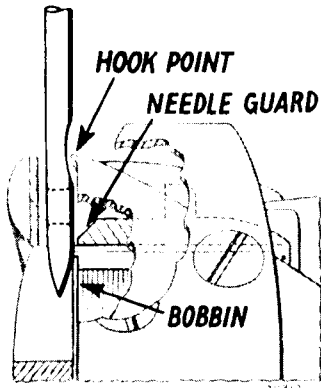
Showing Needle Striking Bobbin Due to Removal of Too Much Metal from Needle Guard
